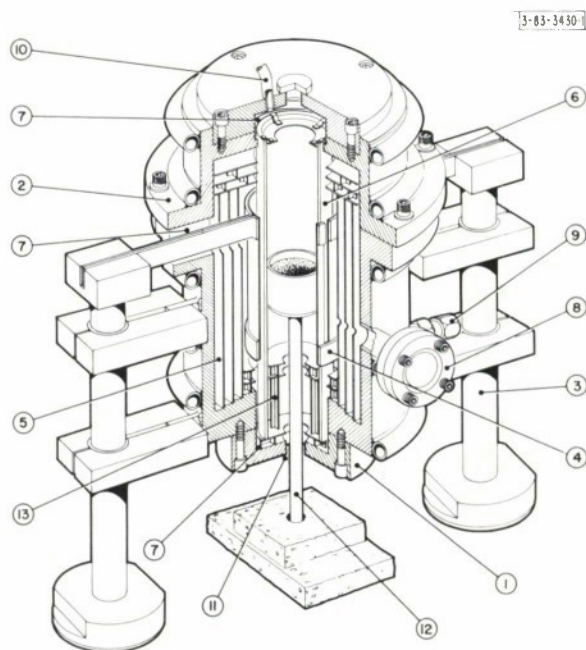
Schematic section view of assembled high-temperature furnace.
